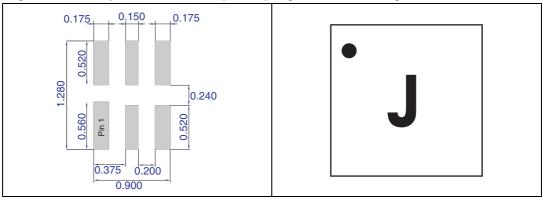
Footprint dimensions (in mm) Figure 15. Marking
